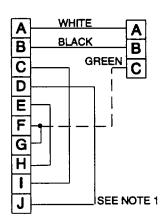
A.C POWER CORD ASSEMBLY (80-10113A)
